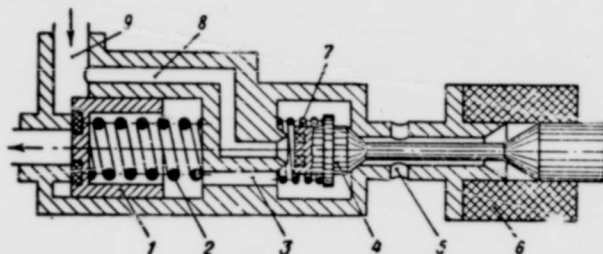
Diagram of an electro-pneumatic valve: 1 – piston-valve; 2 – valve spring; 3, 8 – channels; 4 – control valve; 5 – connecting openings; 6 – electromagnet; 7 – control valve spring; 9 – supply duct.
